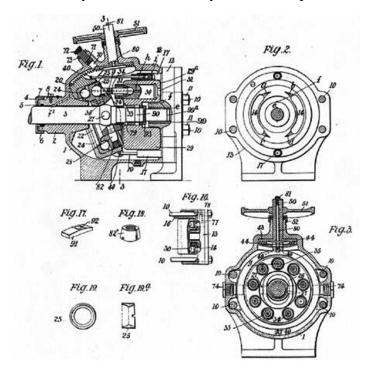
Williams & Janney's Axial Piston Pump and Motor. ca. 1907 [2]
